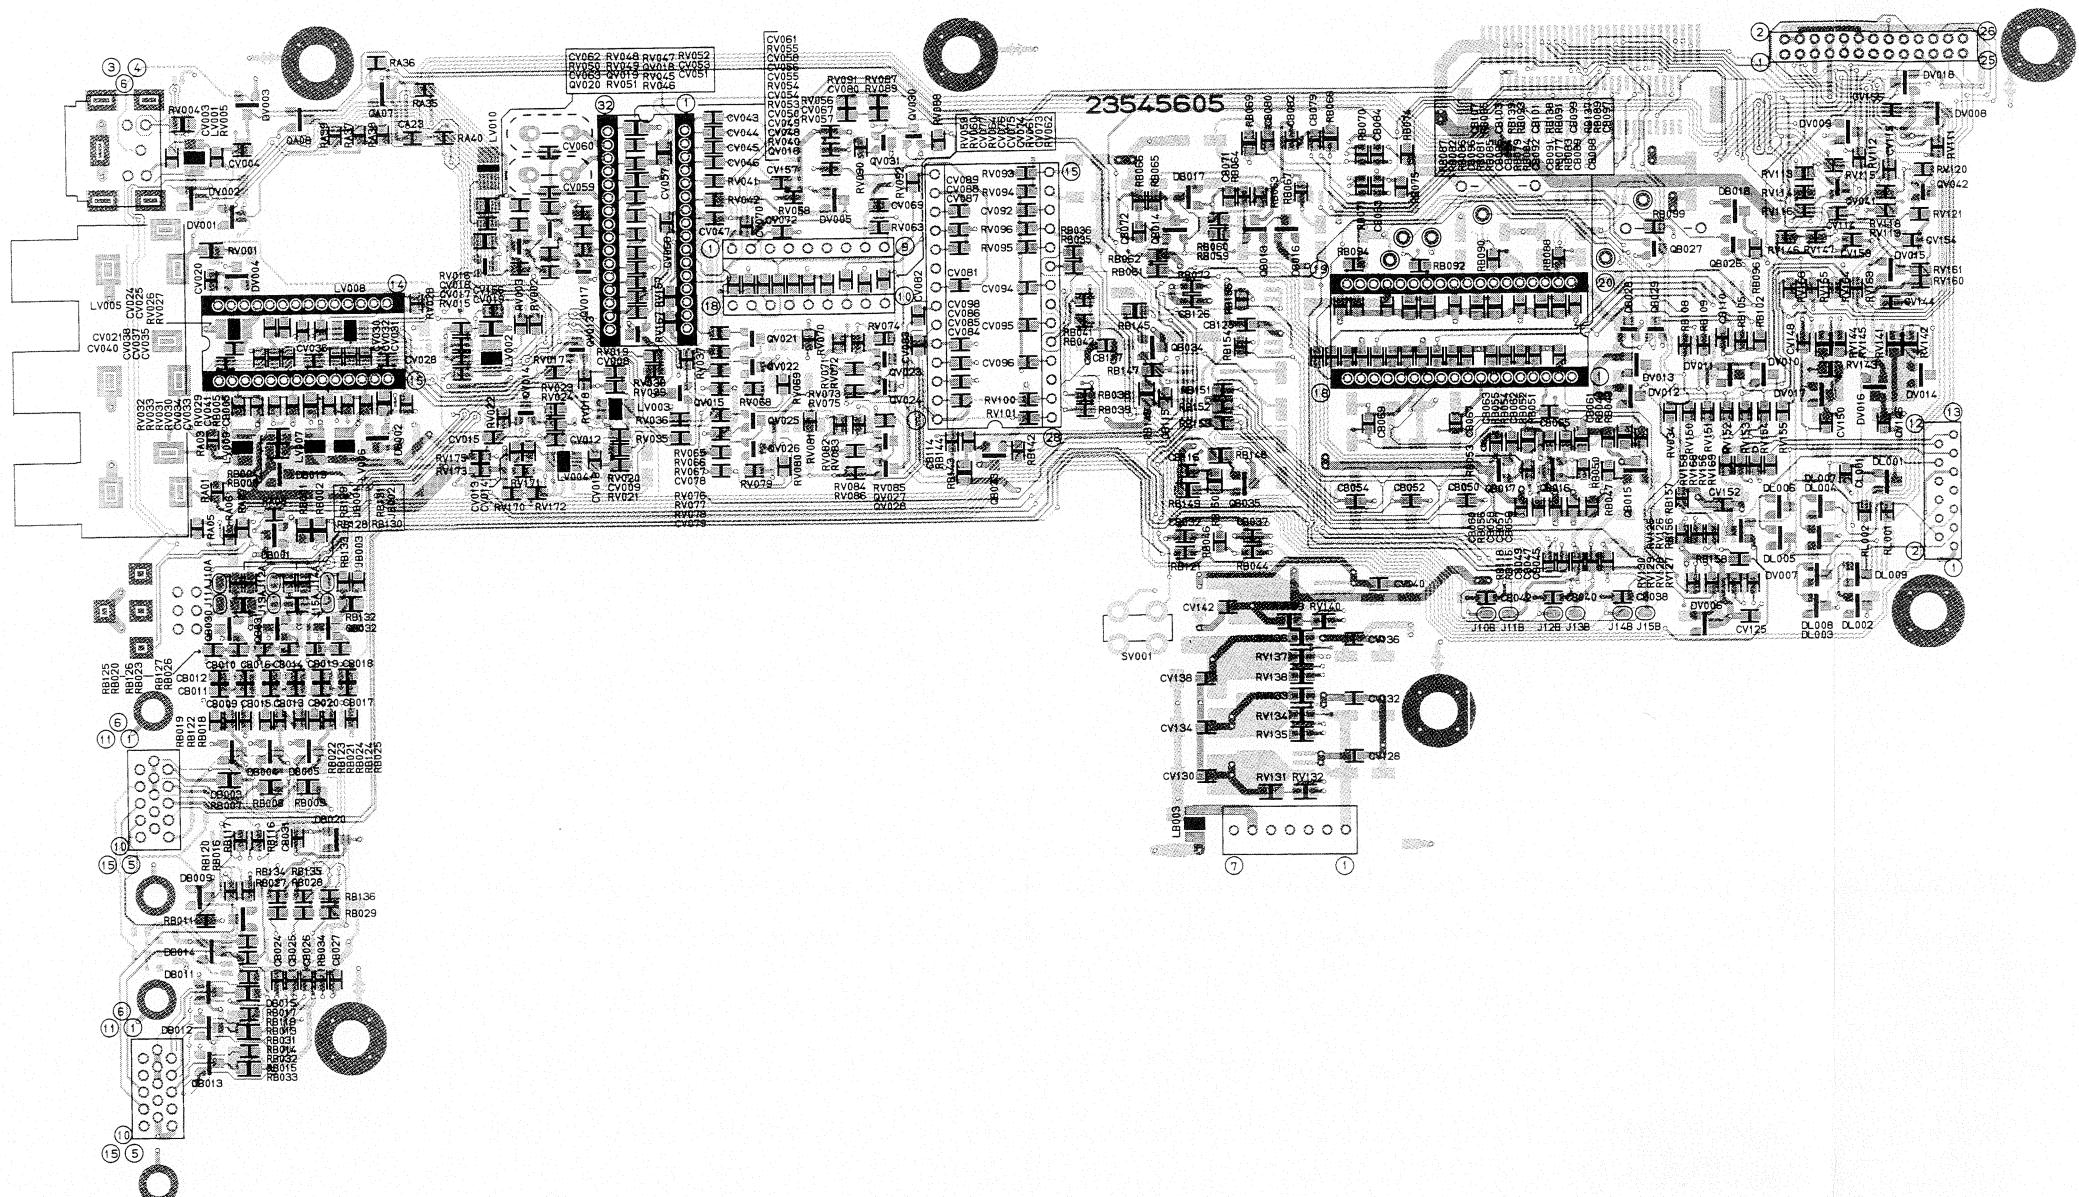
U0031 Video PC Board (Bottom Side)
